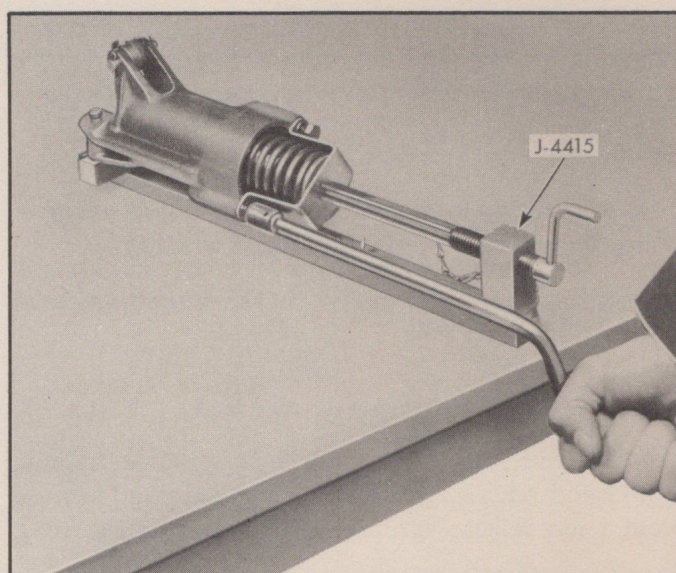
Removing Rear Servo Spring Retainer Bolts
